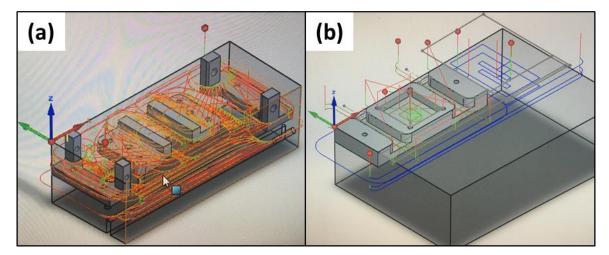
(a) Toolpaths for upper vise assembly components of Apparatus 1. (b) Toolpaths for machining of baseplate for Apparatus 1.
